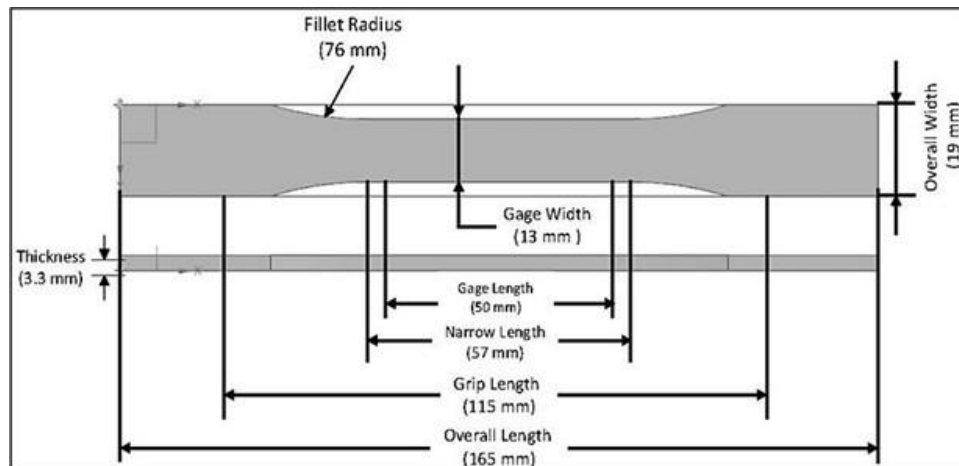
Dimension of Tensile Test based on ASTM D638
